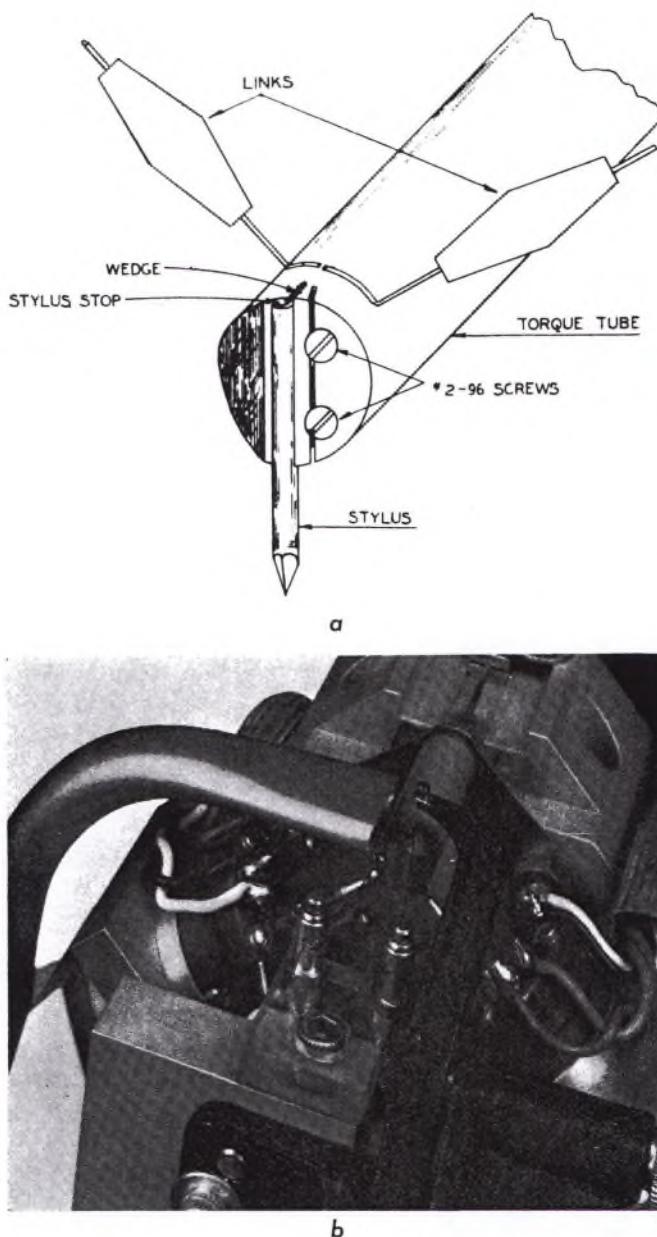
Stylus support for the Westrex 3D Cutter. *a.* Schematic diagram. *b.* Closeup view showing torque tube, self-aligning stylus, and heater wire clips.
